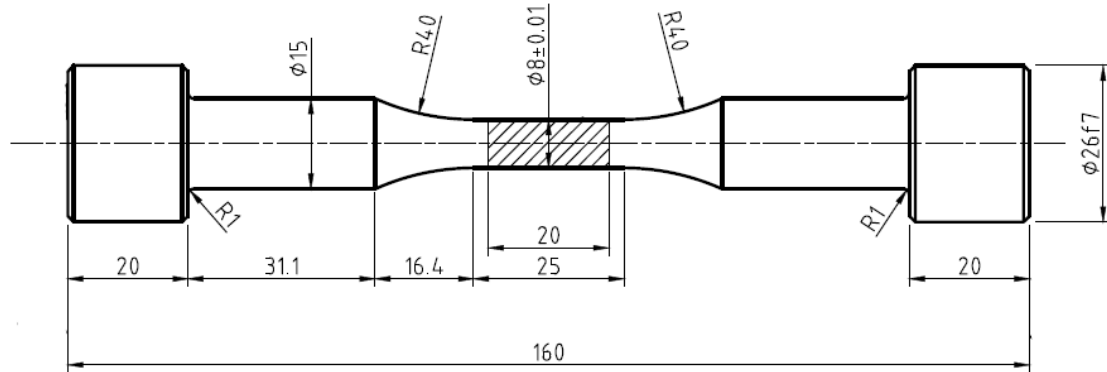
Shape and dimensions of fatigue specimens [mm]
